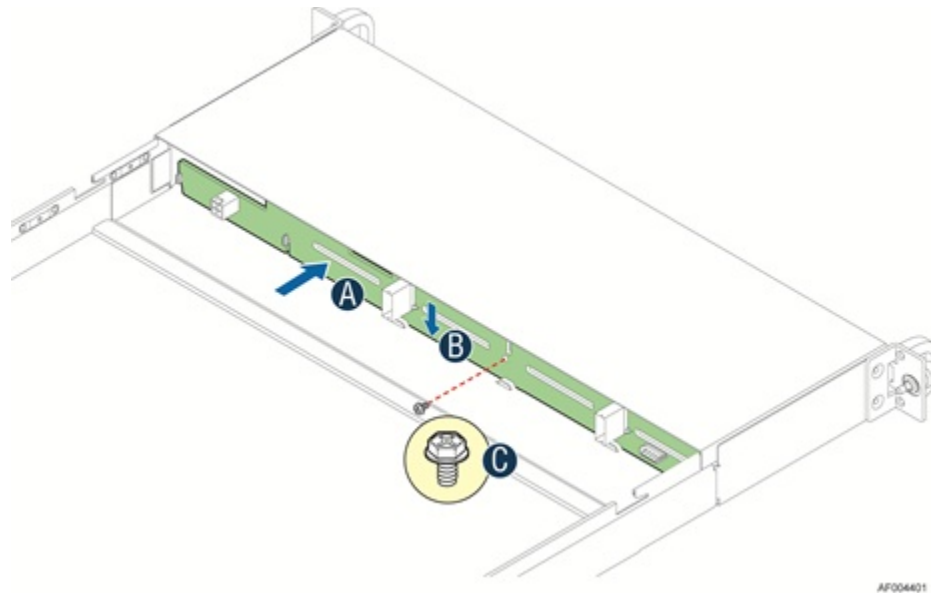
Installing 2.5" Drive Hot-Swap Backplane
